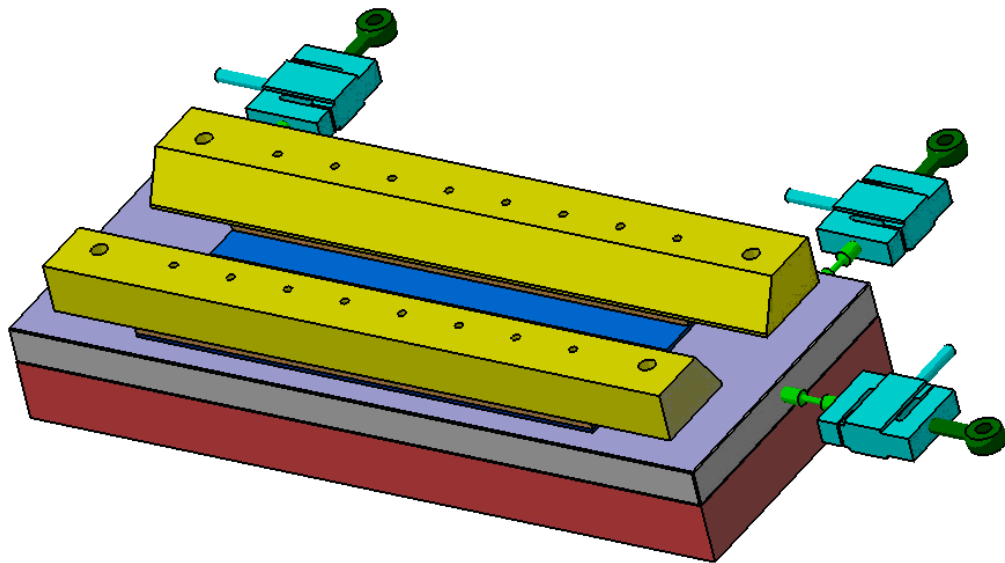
Design of the new clamping fixture: new backing plate, new clamping bars and load cells [28]
